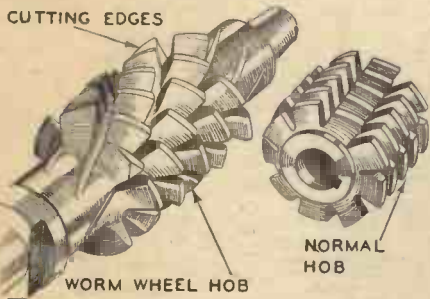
During the process of hobbing the cutters shown are rotated against the edge of the gear wheel blank, which is turned during the process so that teeth are cut
